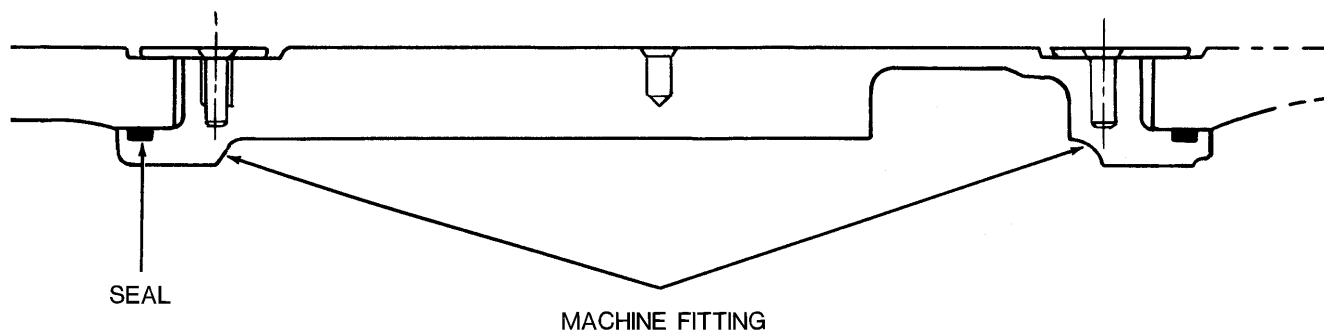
Machine Fitted Plug-Type Access Door for Attaching Screws
